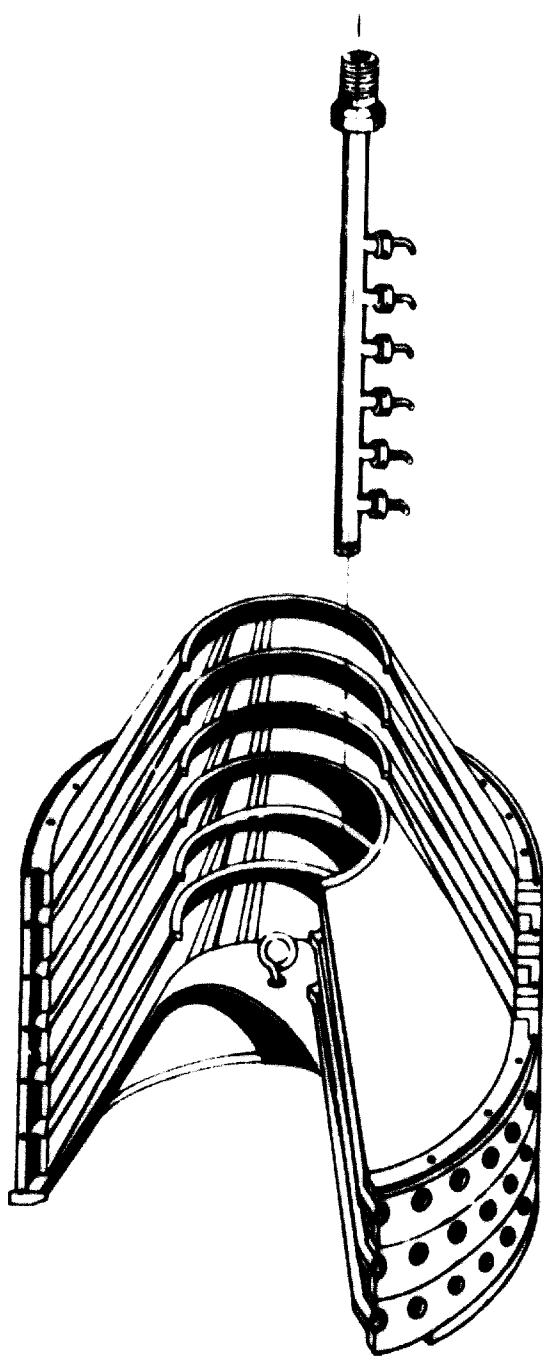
The distributor (top) removed from the rotating surfaces of the Centri-Therm CT6 evaporator
